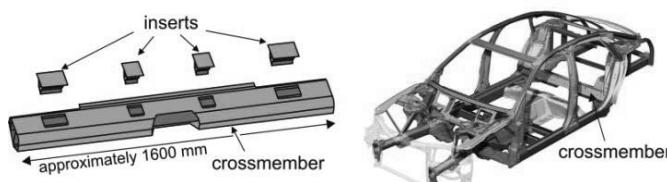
Investigated assembly and its position in the A8 AUDI-Space-Frame (ASF®).
